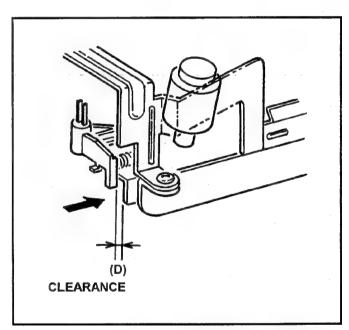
Cleaner Solenoid Position Adjustment
